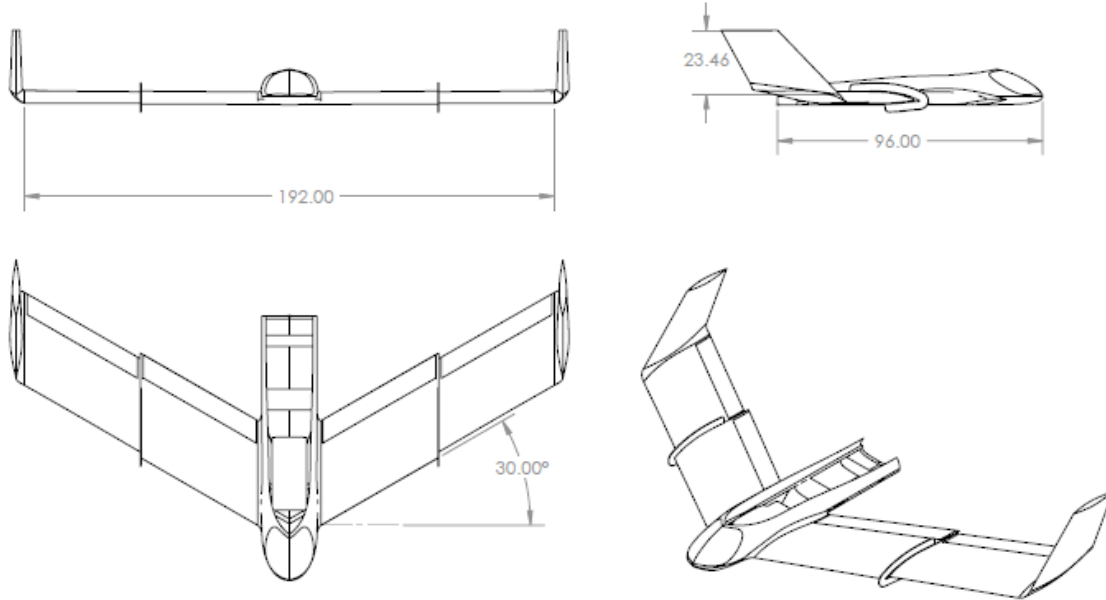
Three-view drawings of the SDG-1 (dimensions in inches)
